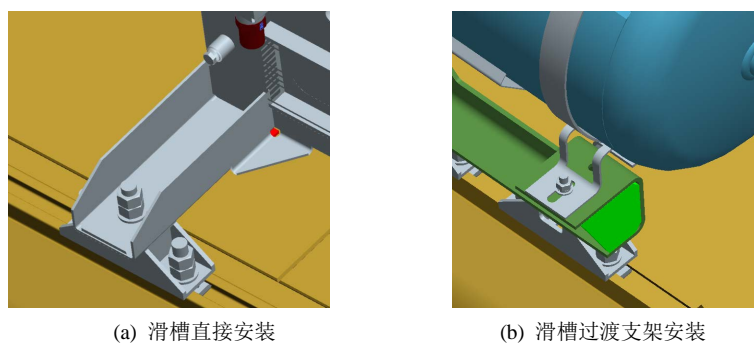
Schematic diagram of roof equipment sliding chute mounting way for suspended monorail
